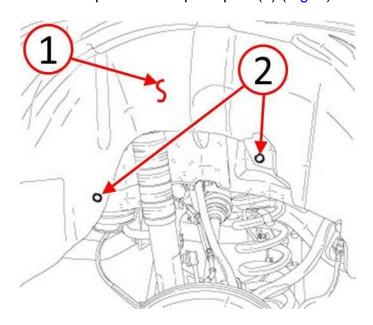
Wheelhouse Splash Shield - Install Push Pins
